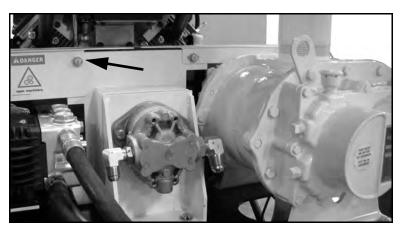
Remove the screw on the back of the sprayer pump belt cover.
